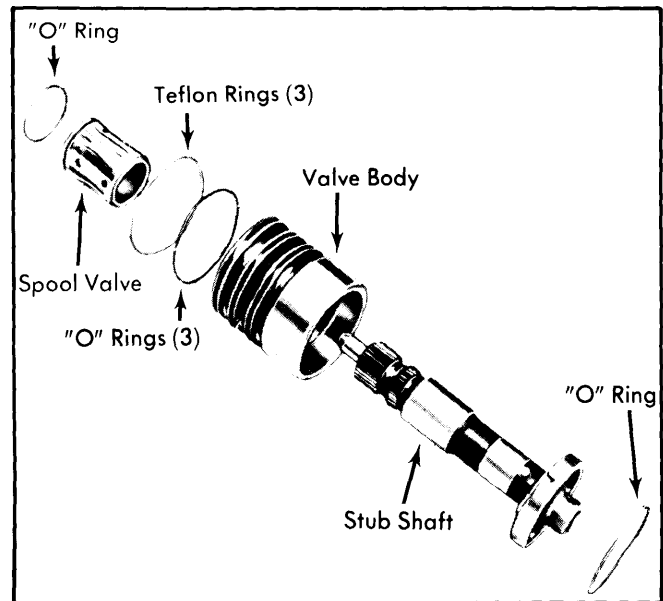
Disassembled View of Valve Body and Input (Stub) Shaft Assembly
